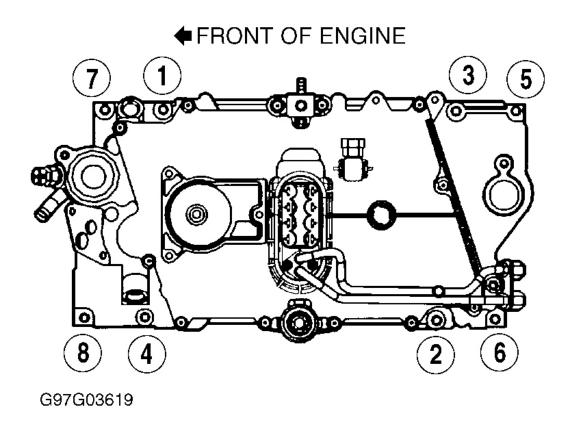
Lower Intake Manifold Bolt Tightening Sequence Courtesy of GENERAL MOTORS CORP.
